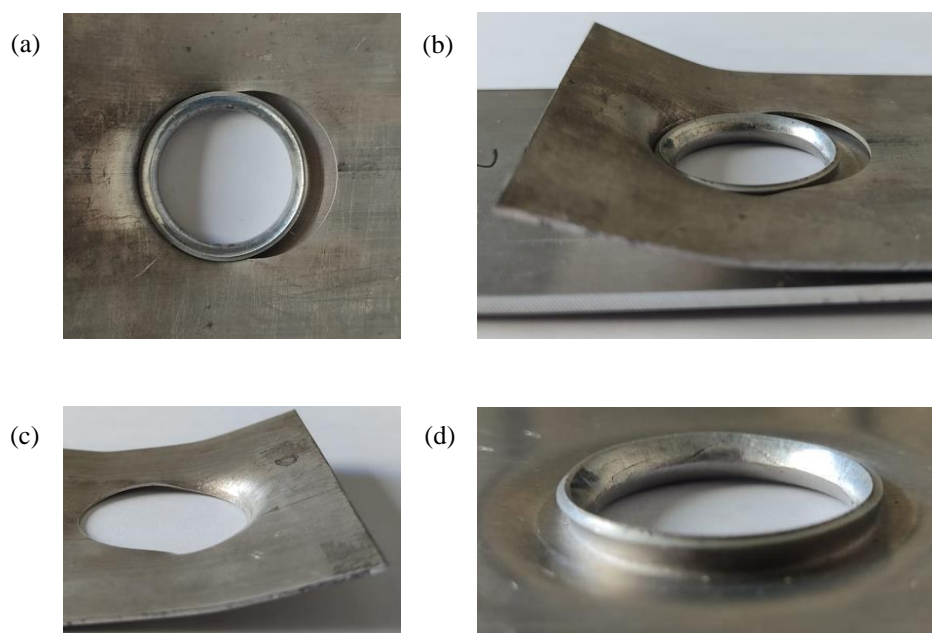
Aspect of a hole hemmed joint and sheets after the single lap shear test: (a) front view and (b) side view of the hole hemmed joint, (c) magnesium sheet and (d) aluminum sheet.
